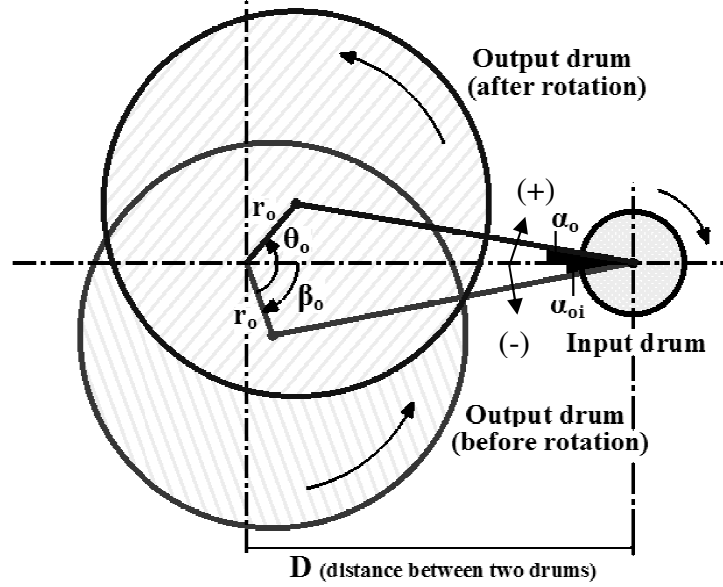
Exaggerated drawing of output drum eccentricity for a capstan drive
